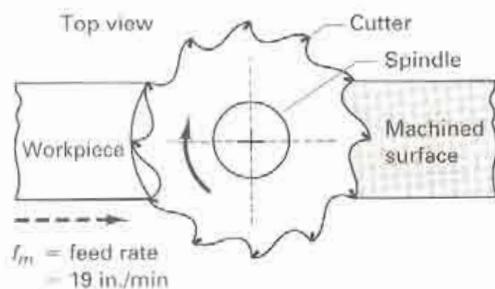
Face milling viewed from above with vertical spindle-machine.
